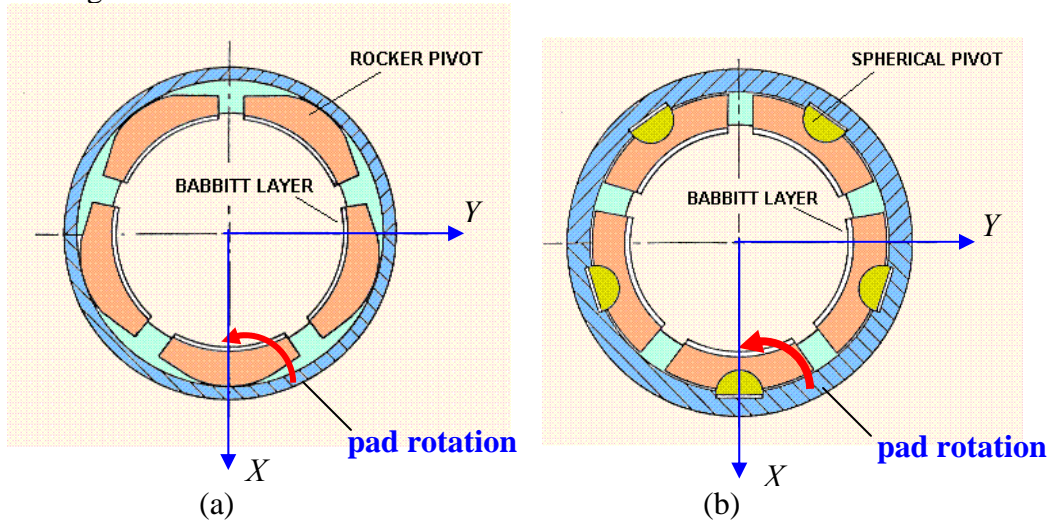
Rocker pivot (a) and spherical pivot (b) in a tilting pad journal bearing [15]
